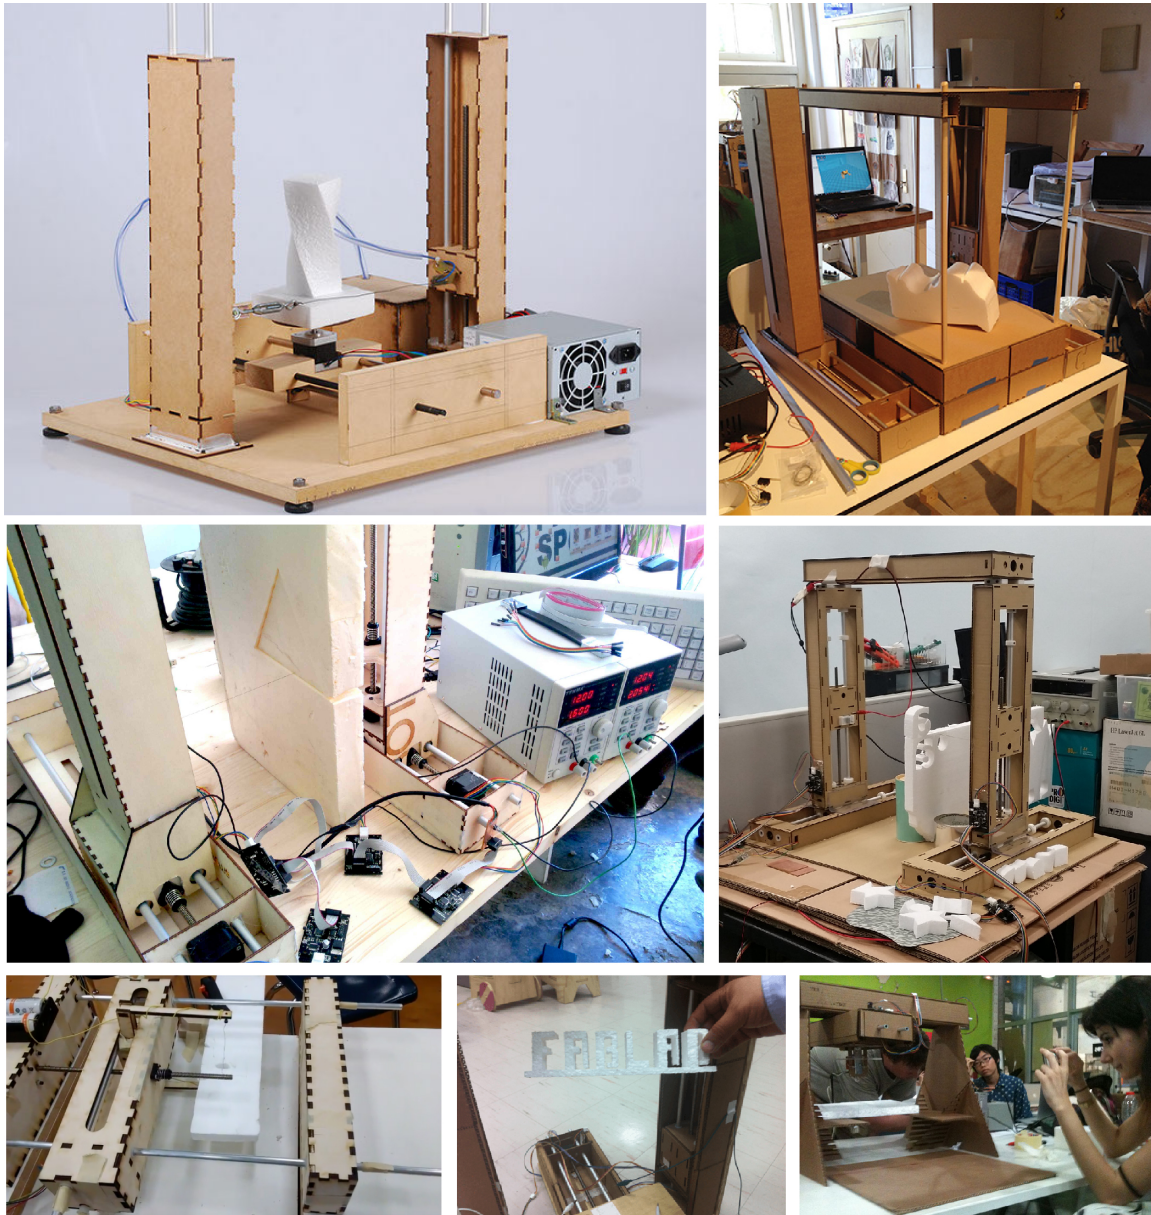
Modular hot wire cutting machines. Clockwise from top left, a four-DoF hot wire cutter (including rotating platform) by Fablab Puebla, a hot wire cutter by Fablab Waag Amsterdam, a three-DoF machine by Fablab Singapore Polytechnic, a hot wire cutter by Fablab Barcelona, results from a hot wire cutter at the Tecsup Fablab in Peru, and finally, a hot wire cutter by the Gregory School Fablab in Tuscon, AZ.
